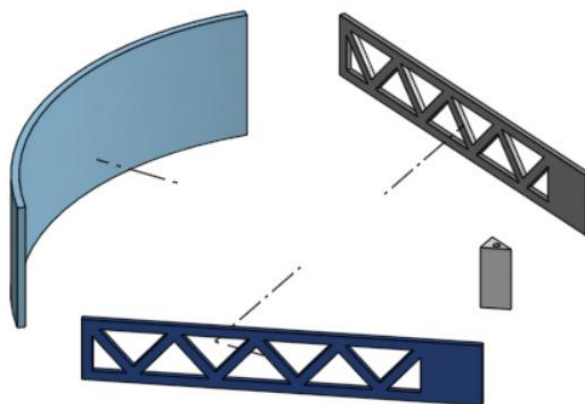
Exploded View: Individual Components of the Assembled Structure
